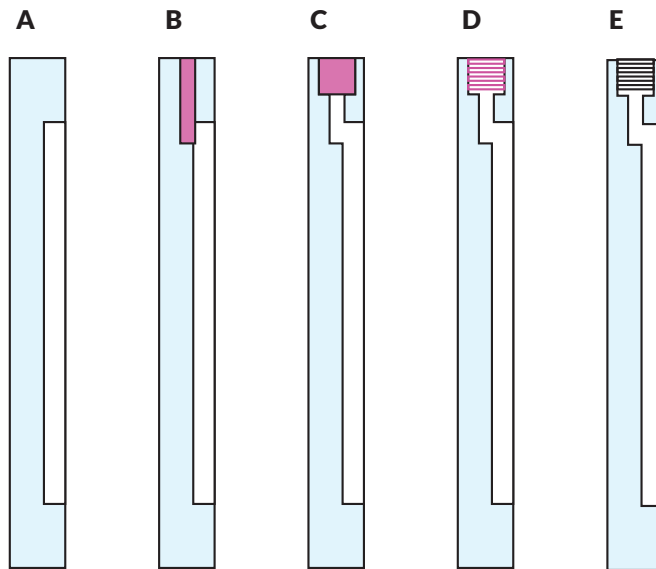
Side access port manufacturing steps (A) Part is fixtured side-on. (B) A  $\frac{1}{8}$ " access channel is milled. (C) A 5.41 mm pilot hole for threading is milled. (D) The pilot hole is threaded to  $\frac{1}{4}$ "-28 UNF specifications using a machine tap and tapping apparatus. (E) The final part now contains a side channel with  $\frac{1}{4}$ "-28 UNF fluidic fitting in direct communication with its interior cavity.
